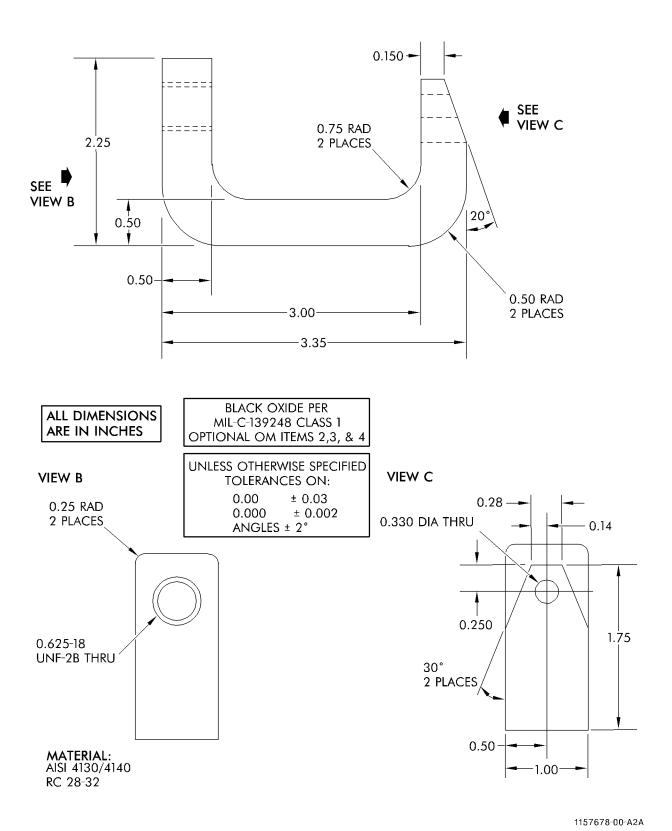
Clinch Nut Flaring Set LMT 962 (Sheet 3 of 3)
